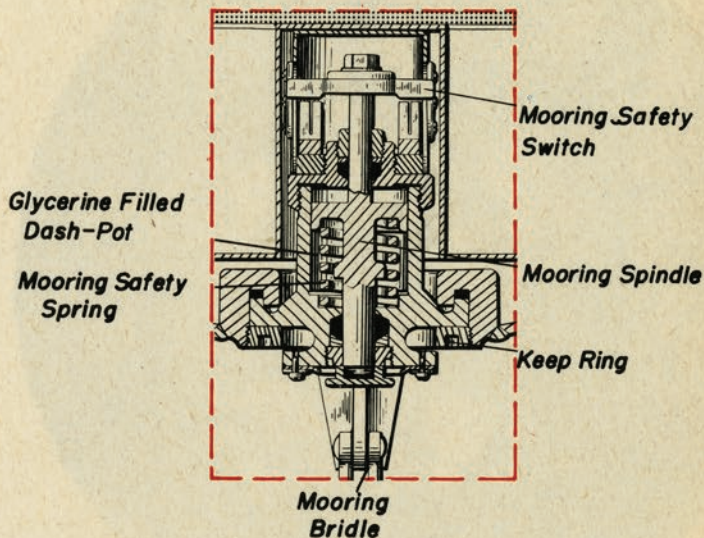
Mooring Safety Switch Detail, Mine Type JH
